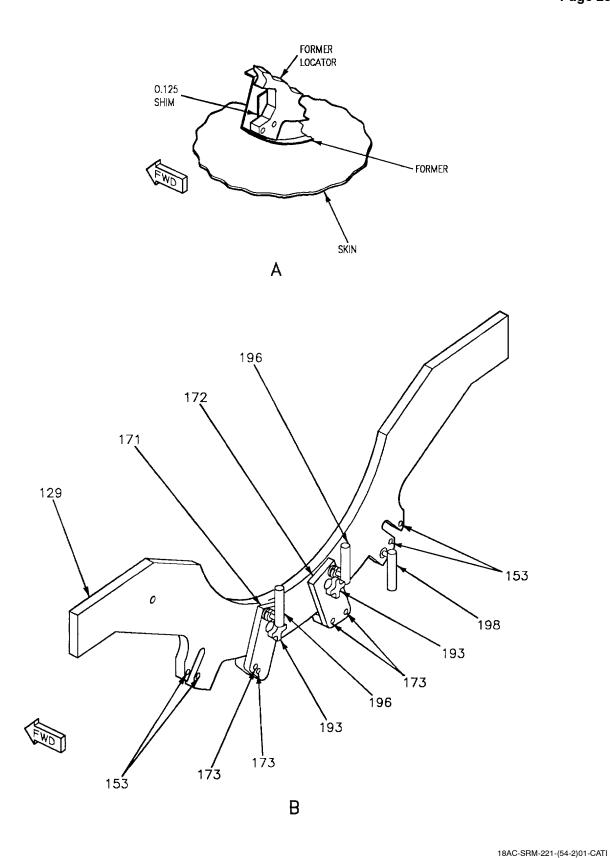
Inspection or Replacement - 74A313187 Former (Sheet 2)
